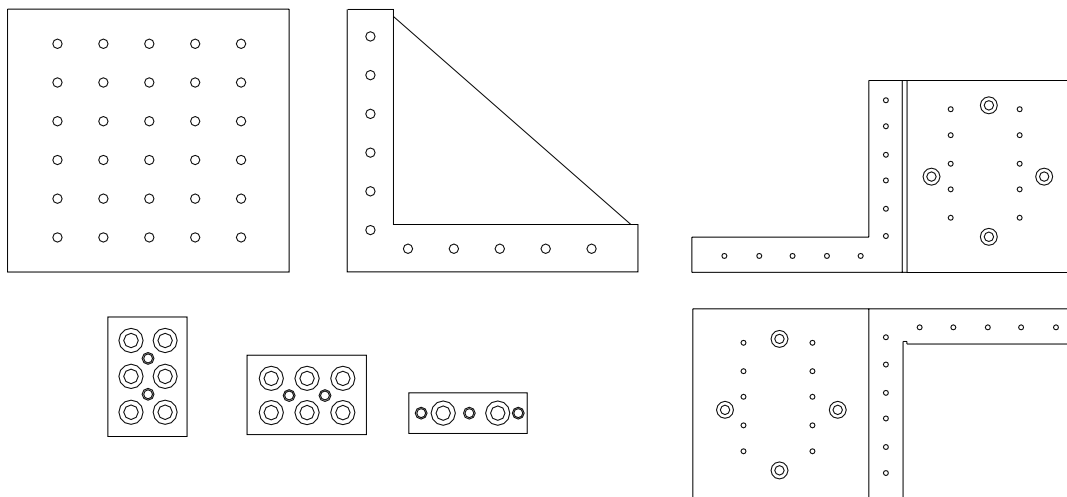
Modular fixture elements used for supporting complex workpieces.
